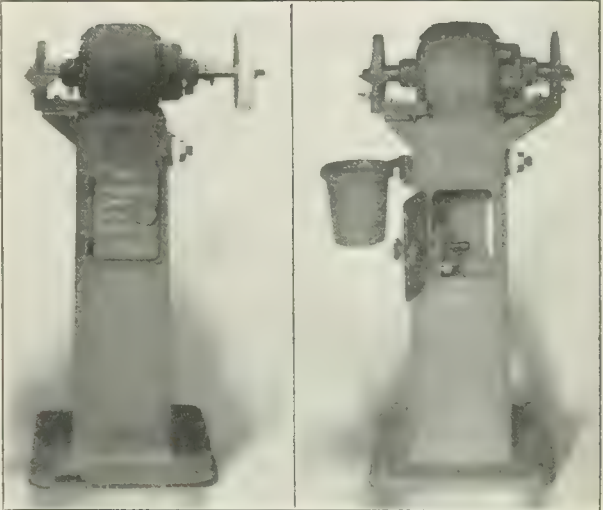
The Machine Arranged for Buffing. Fig. 2.—View Showing Starting Mechanism. Two Views of the No. 1/2 Emery Grinder Built by the Bridgeport Safety Emery Wheel Company, Bridgeport, Conn.
